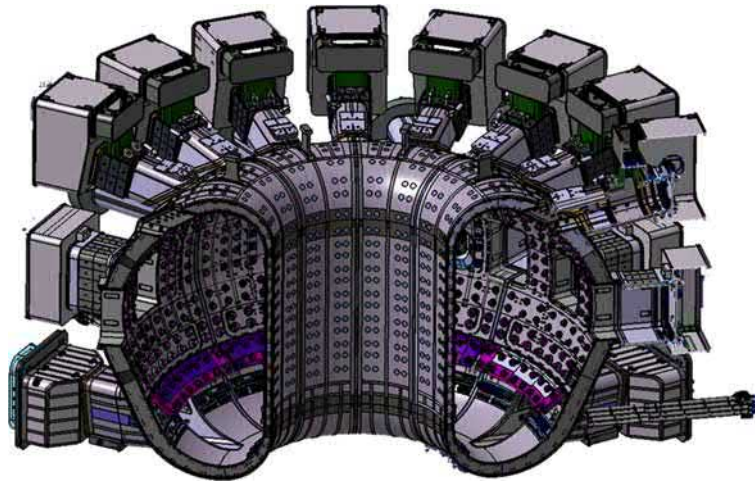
View of four sectors of the assembled ITER VV with upper, equatorial and lower ports and IVC support structures (pink) on the inner shell. Support structures below the lower ports and port plugs not shown. The splice plates used to assemble the sectors and some of the ports are highlighted in dark gray. From ITER organisation.
